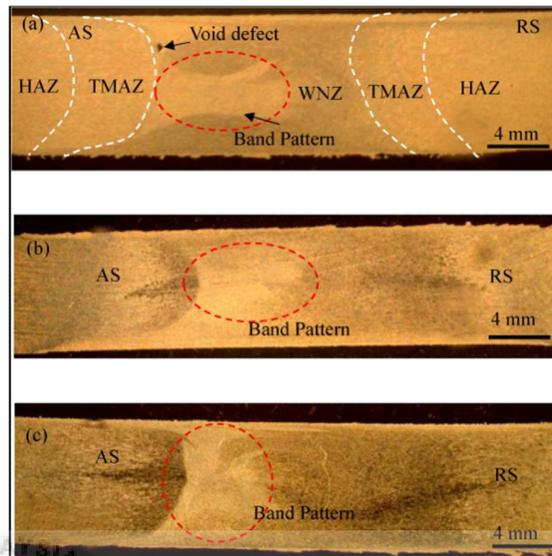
An optical macrograph of the cross-section of BTFSW sample welded with shoulder diameter (a) 20 mm (b) 22 mm (c) 24 mm (Fuse & Badheka, 2020).
